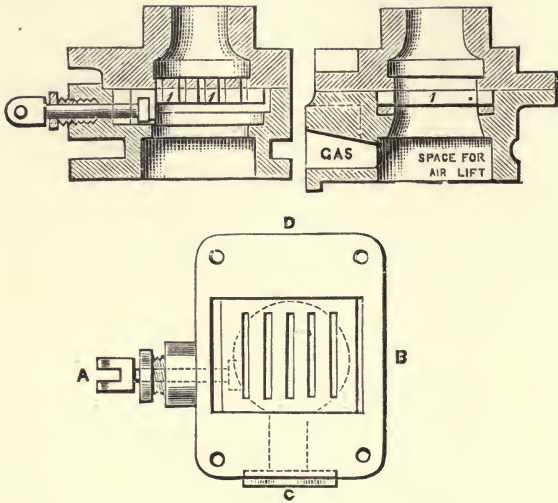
Sections and Plan, Governor Slide, Clerk Engine.
